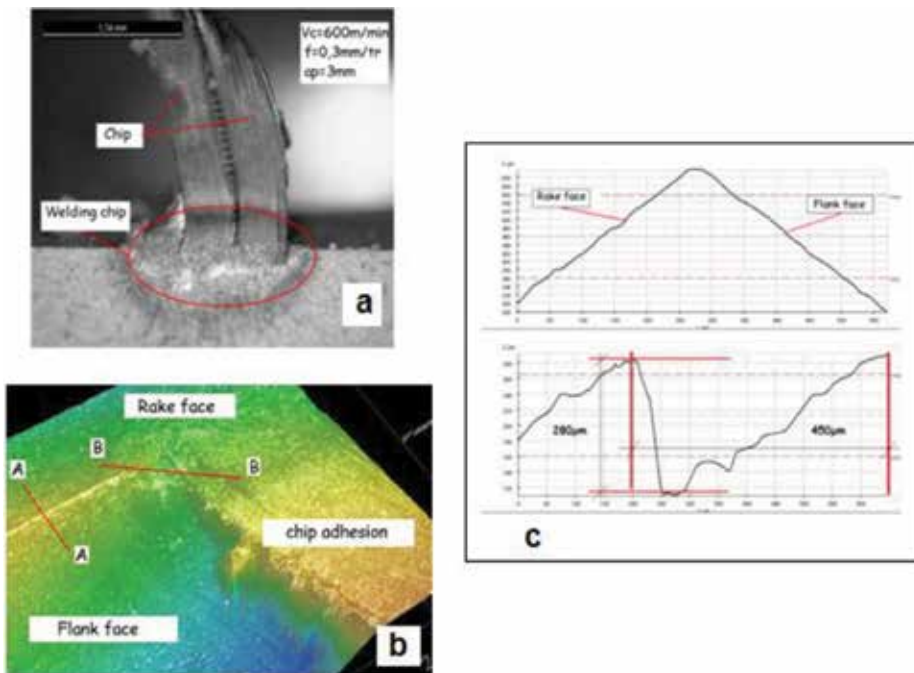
(a) Photography of chip welding on rake face, (b) 3D confocal image of the cutting insert (600 m/min, $f = 0.1$ mm/rev, $a_p = 3$ mm), (c) profile diagram obtained by skew right unworn cutting edge and profile of crater failure under chip welding.
